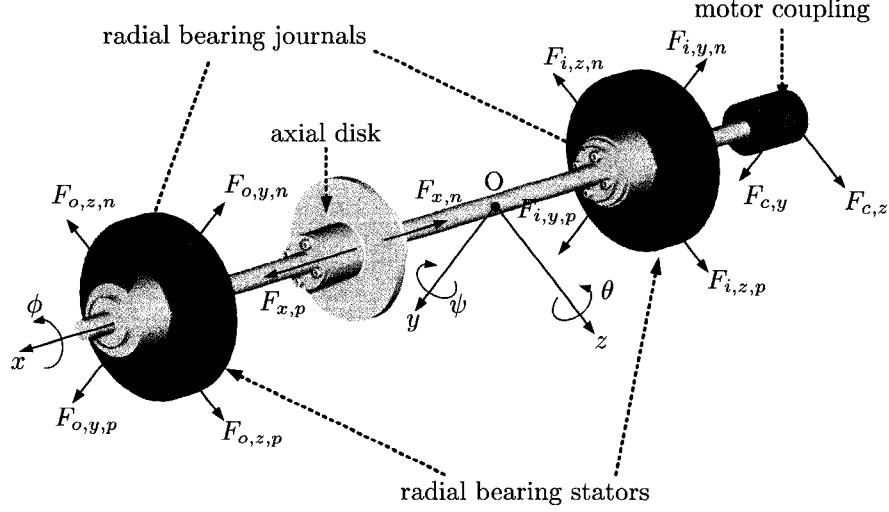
Shaft assembly, motor coupling and radial bearing stators for a five degree-of-freedom magnetic bearing system. The shaft assembly is treated as a rigid body for the purpose of modeling.
